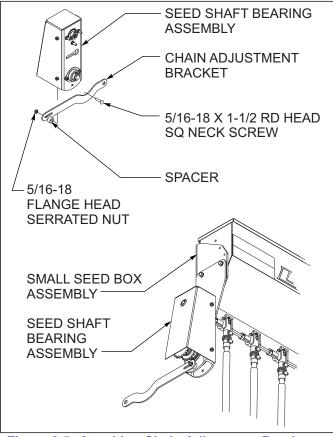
Attaching Chain Adjustment Bracket to Small Seed Bearing Assembly
